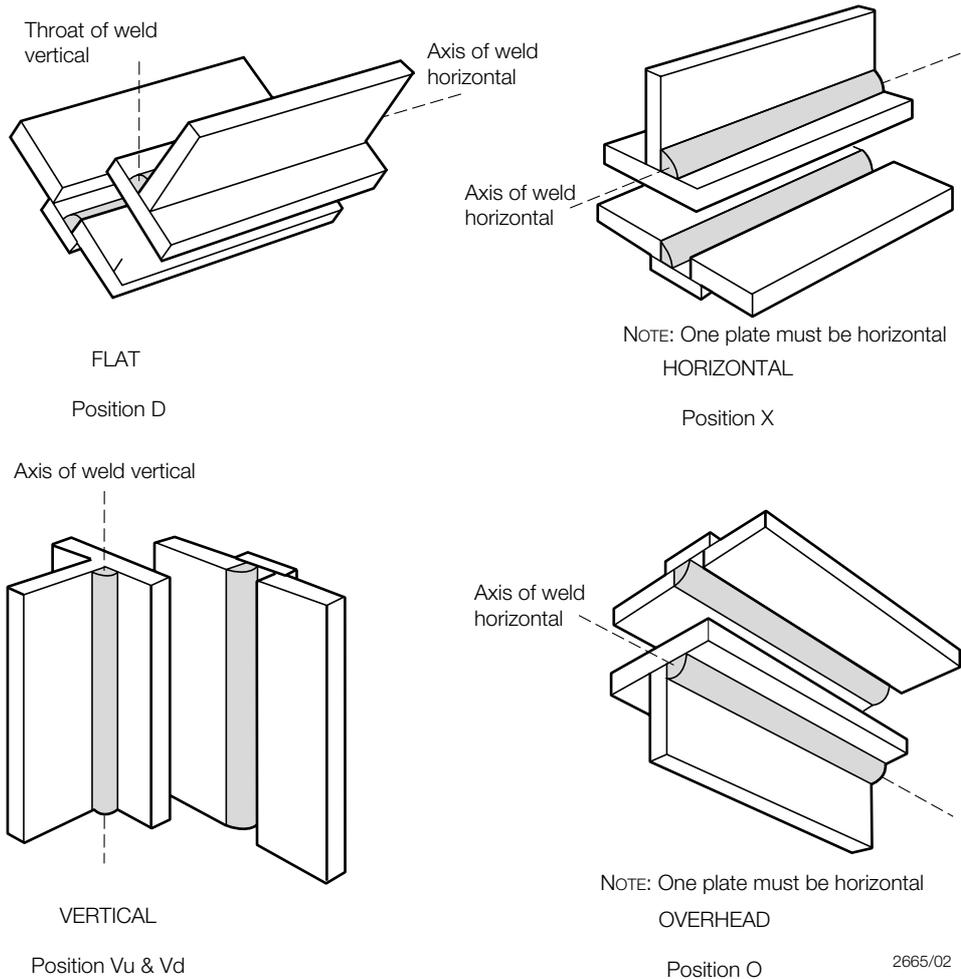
(c) Plate fillet weld test positions
